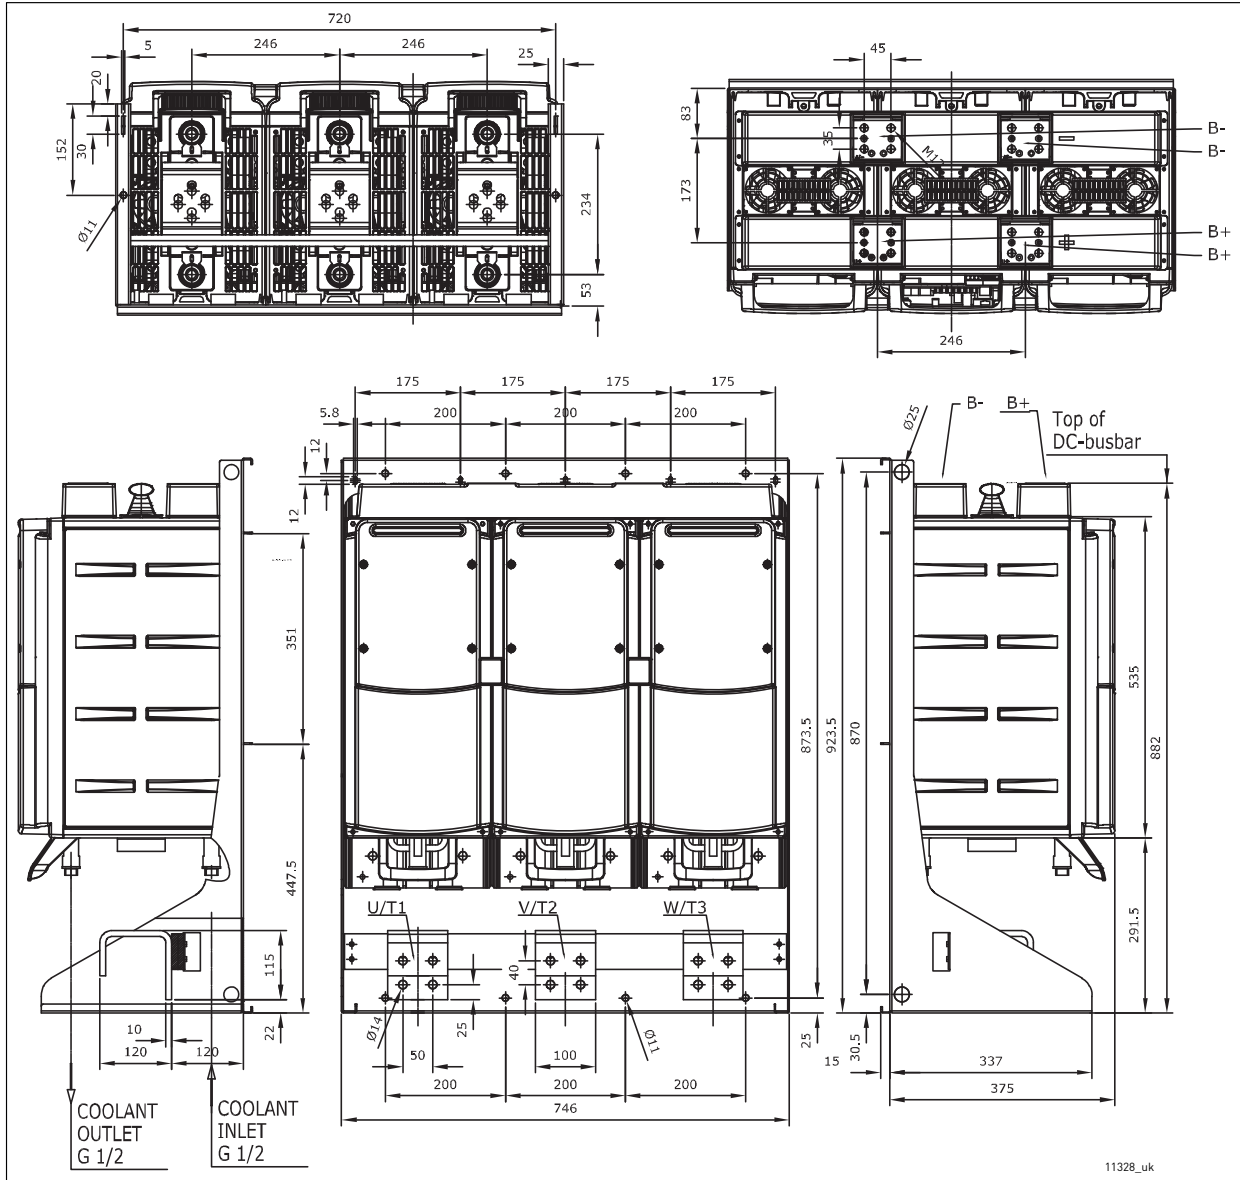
VACON[®] NX Liquid-cooled inverter dimensions, CH64, IP00 (UL open type)
